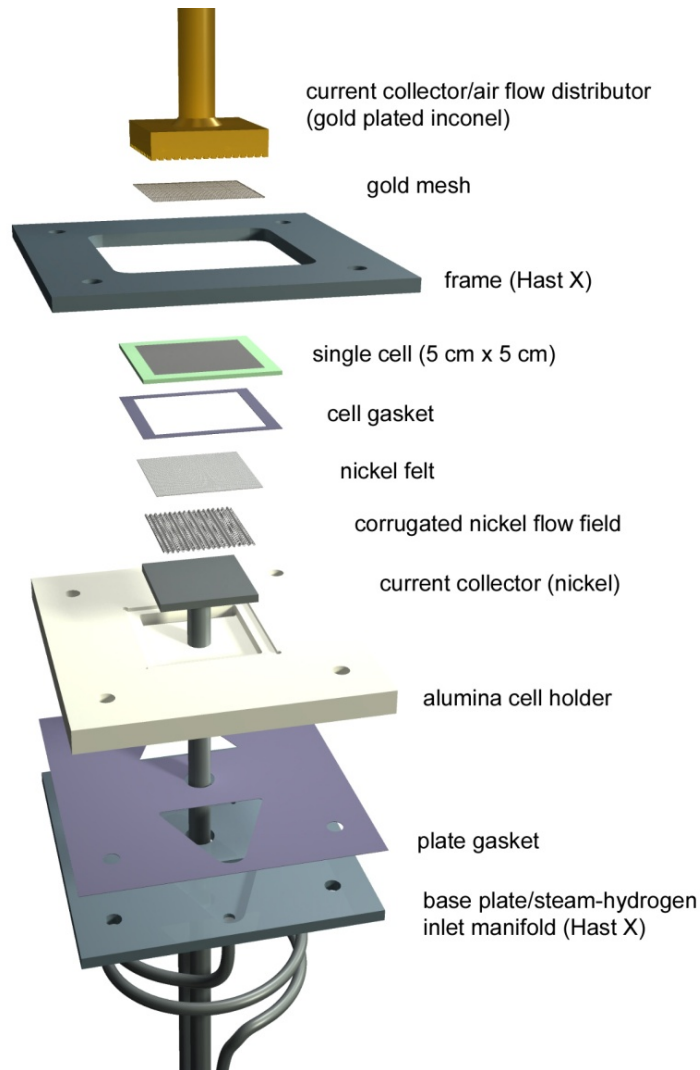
Exploded view of the cell fixture used for testing SOFCpower Inc. SOECs.
